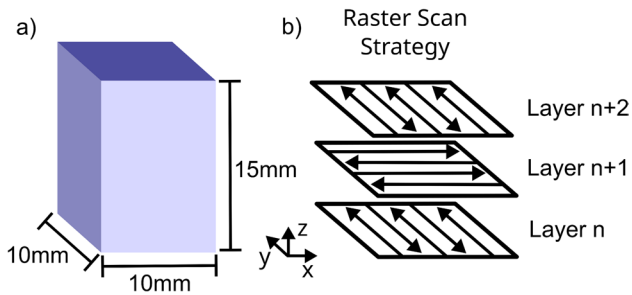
a Schematic with dimensions of the cuboidal geometries printed. b Schematic of the raster geometry with the 90° rotation per layer
